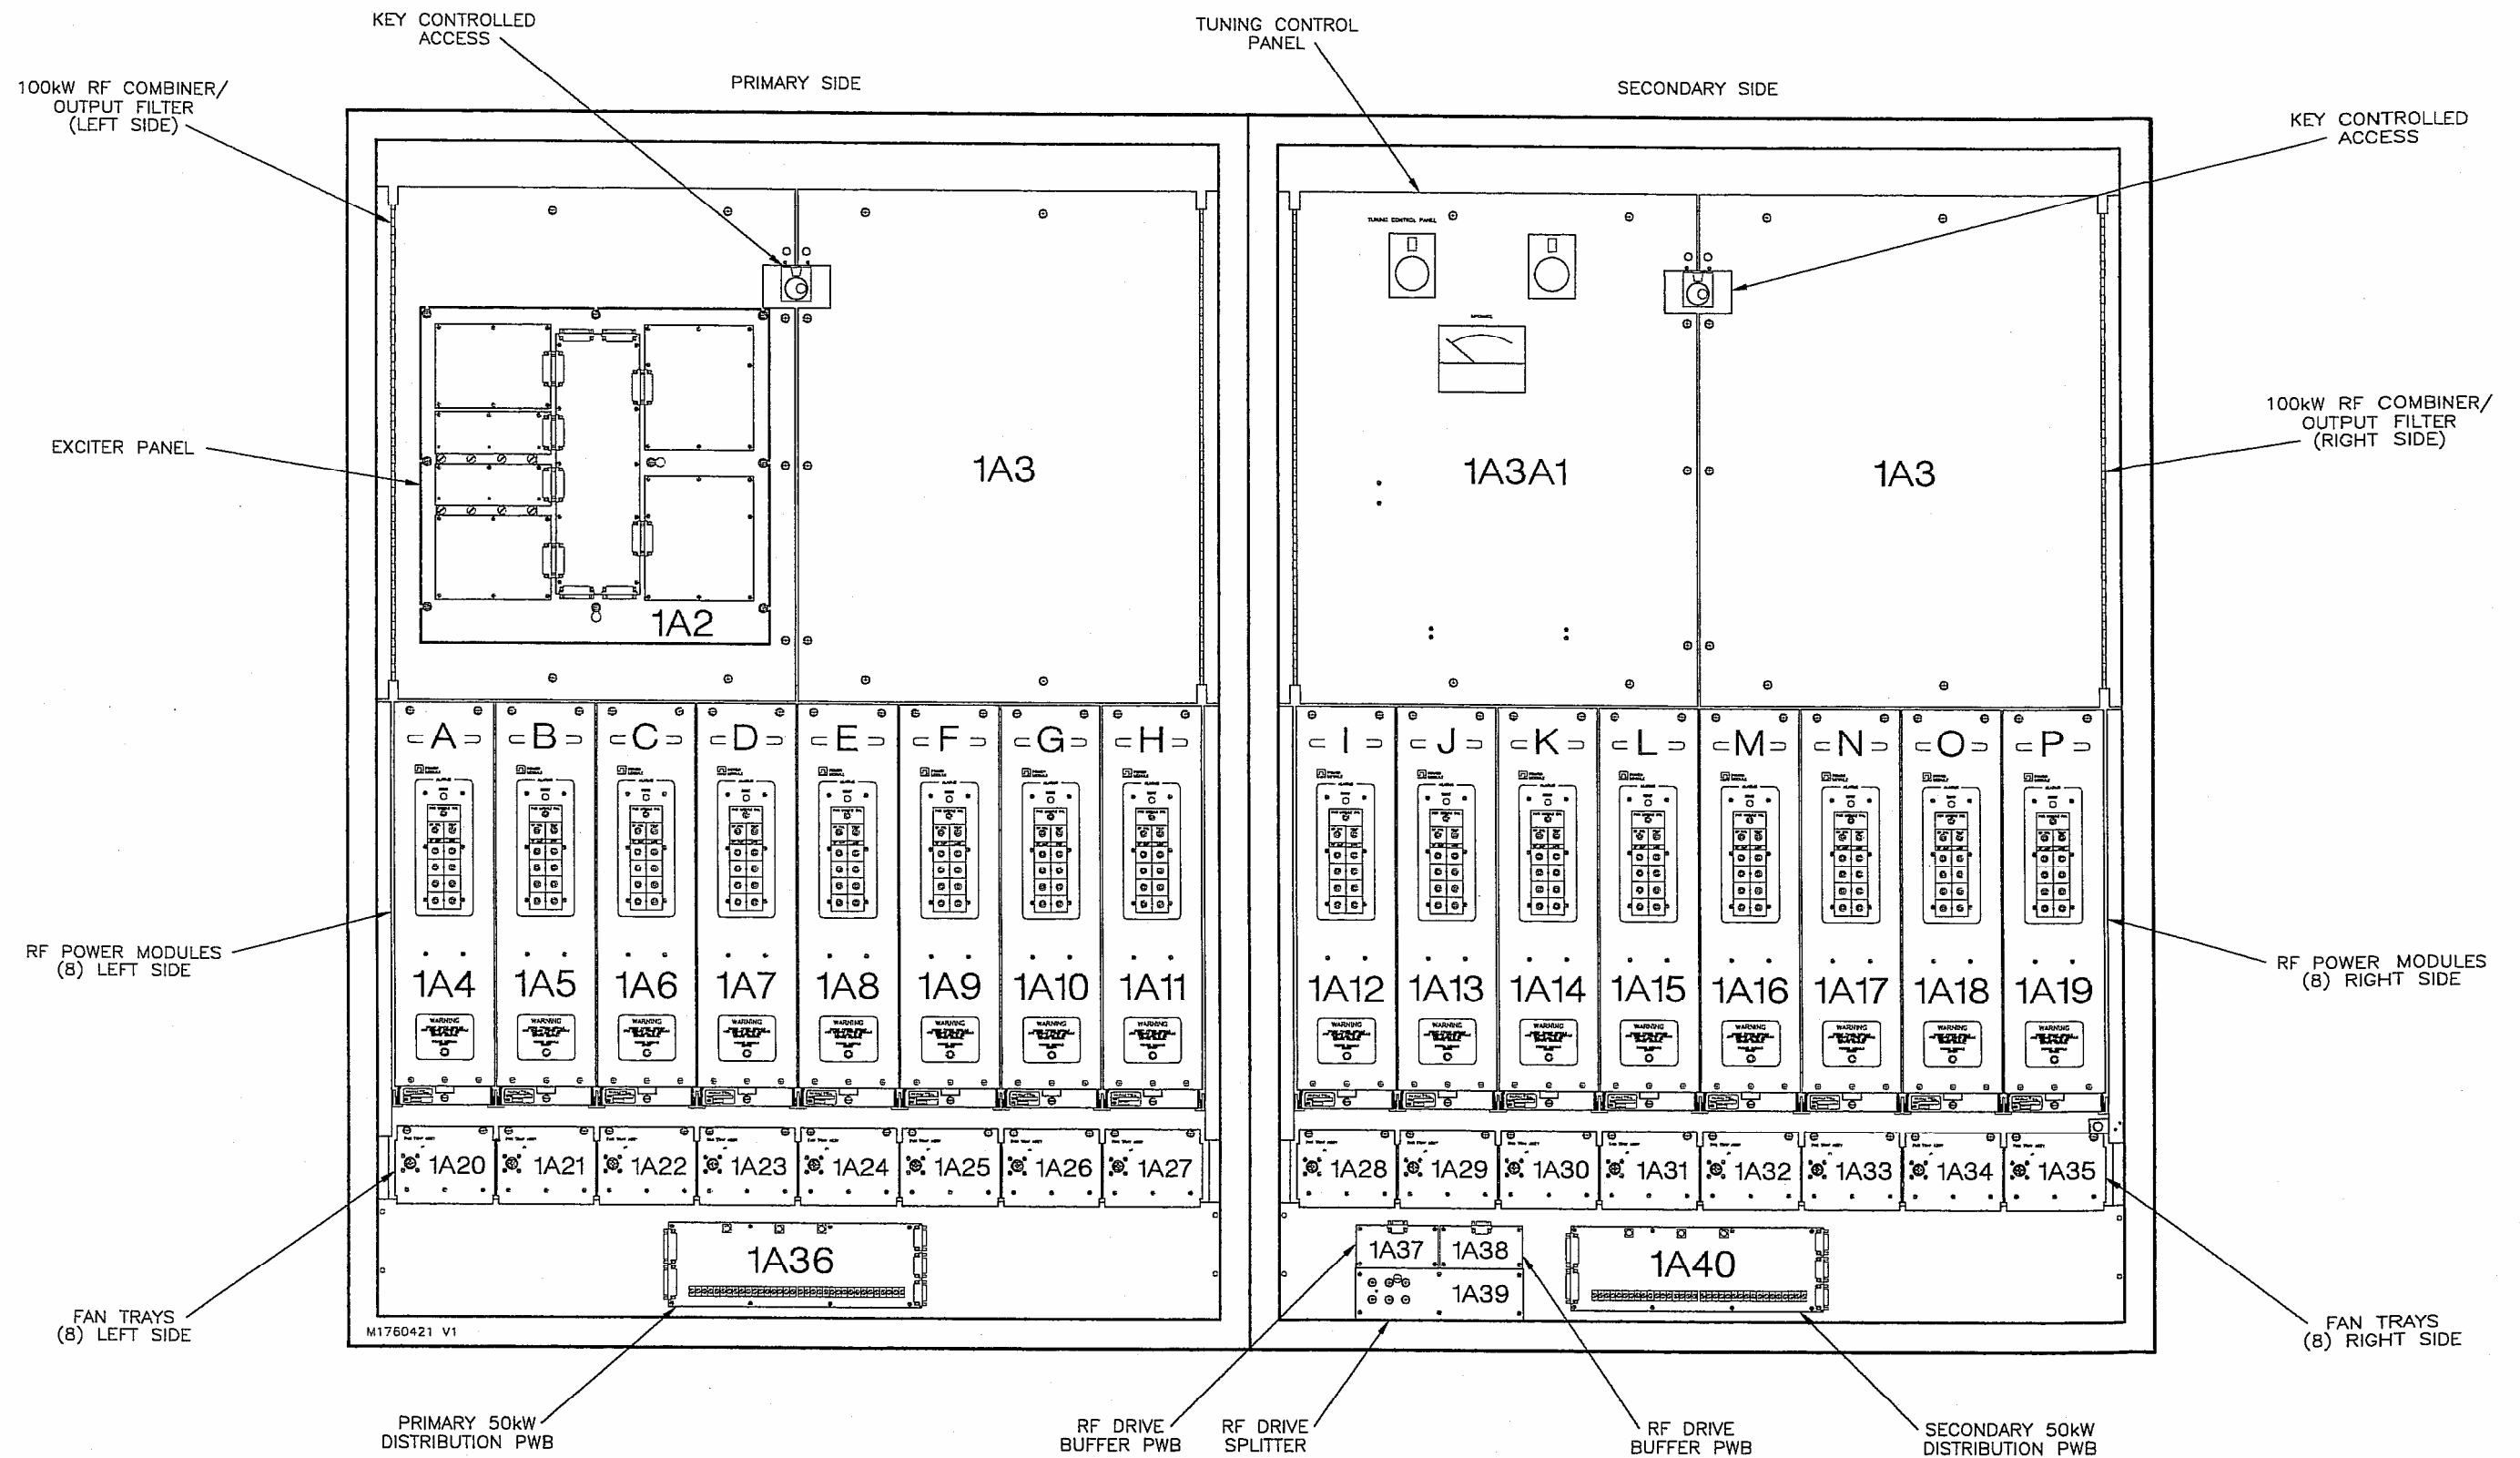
Assembly Detail - NAR199D 100kW RF Power Module Cabinet (Front)
